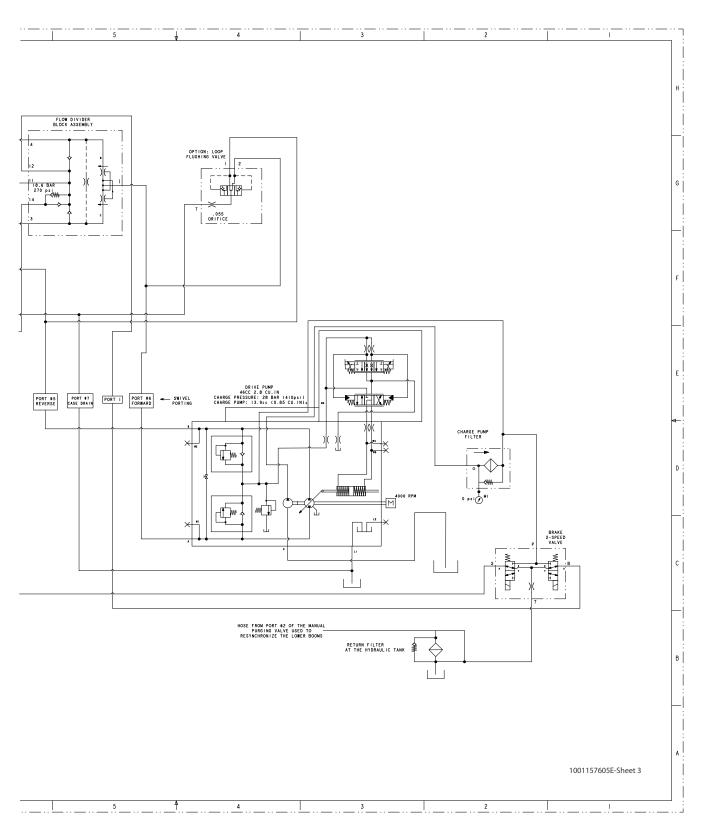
2-Wheel Drive Hydraulic Schematic 2 of 2
